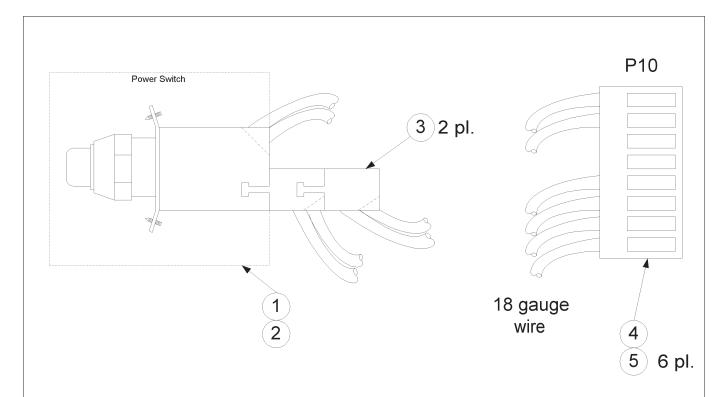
POWER SWITCH ASSEMBLY EXPLODED VIEW
